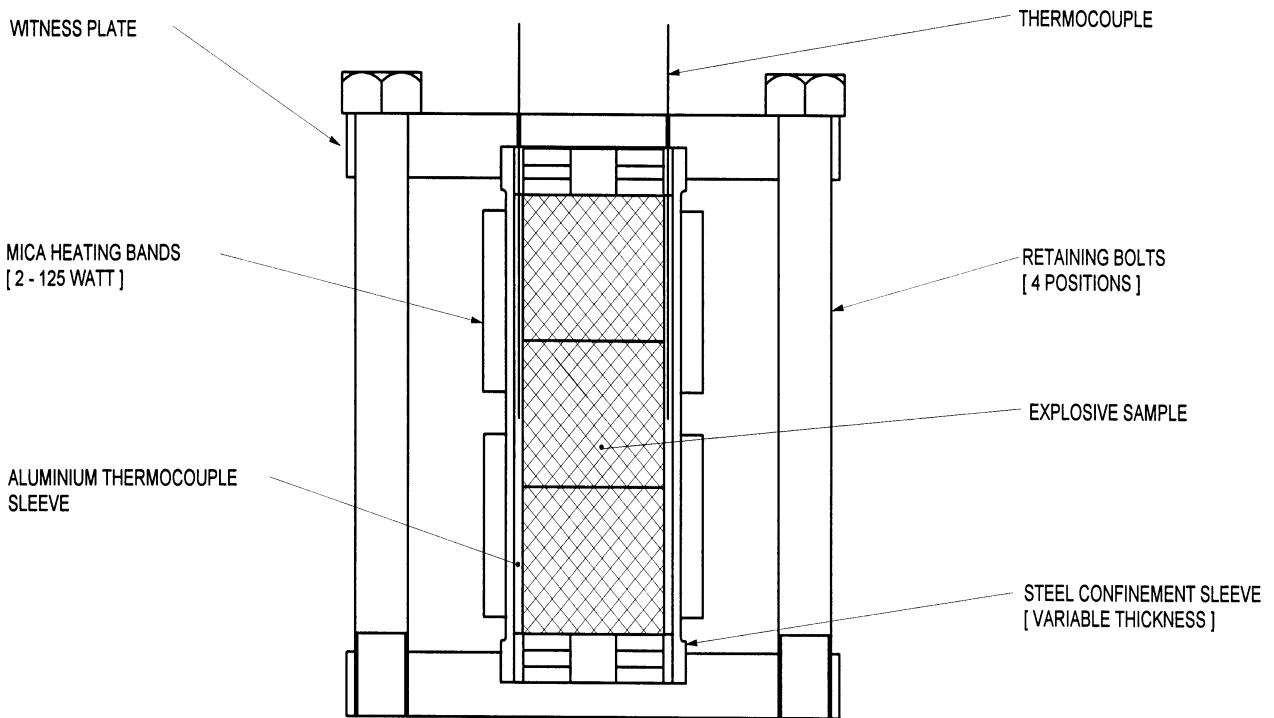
ASSEMBLY SECTIONED VIEW
